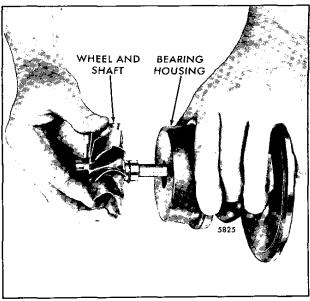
Installing Shaft and Wheel Assembly Through Back Plate into Bearing Housing
